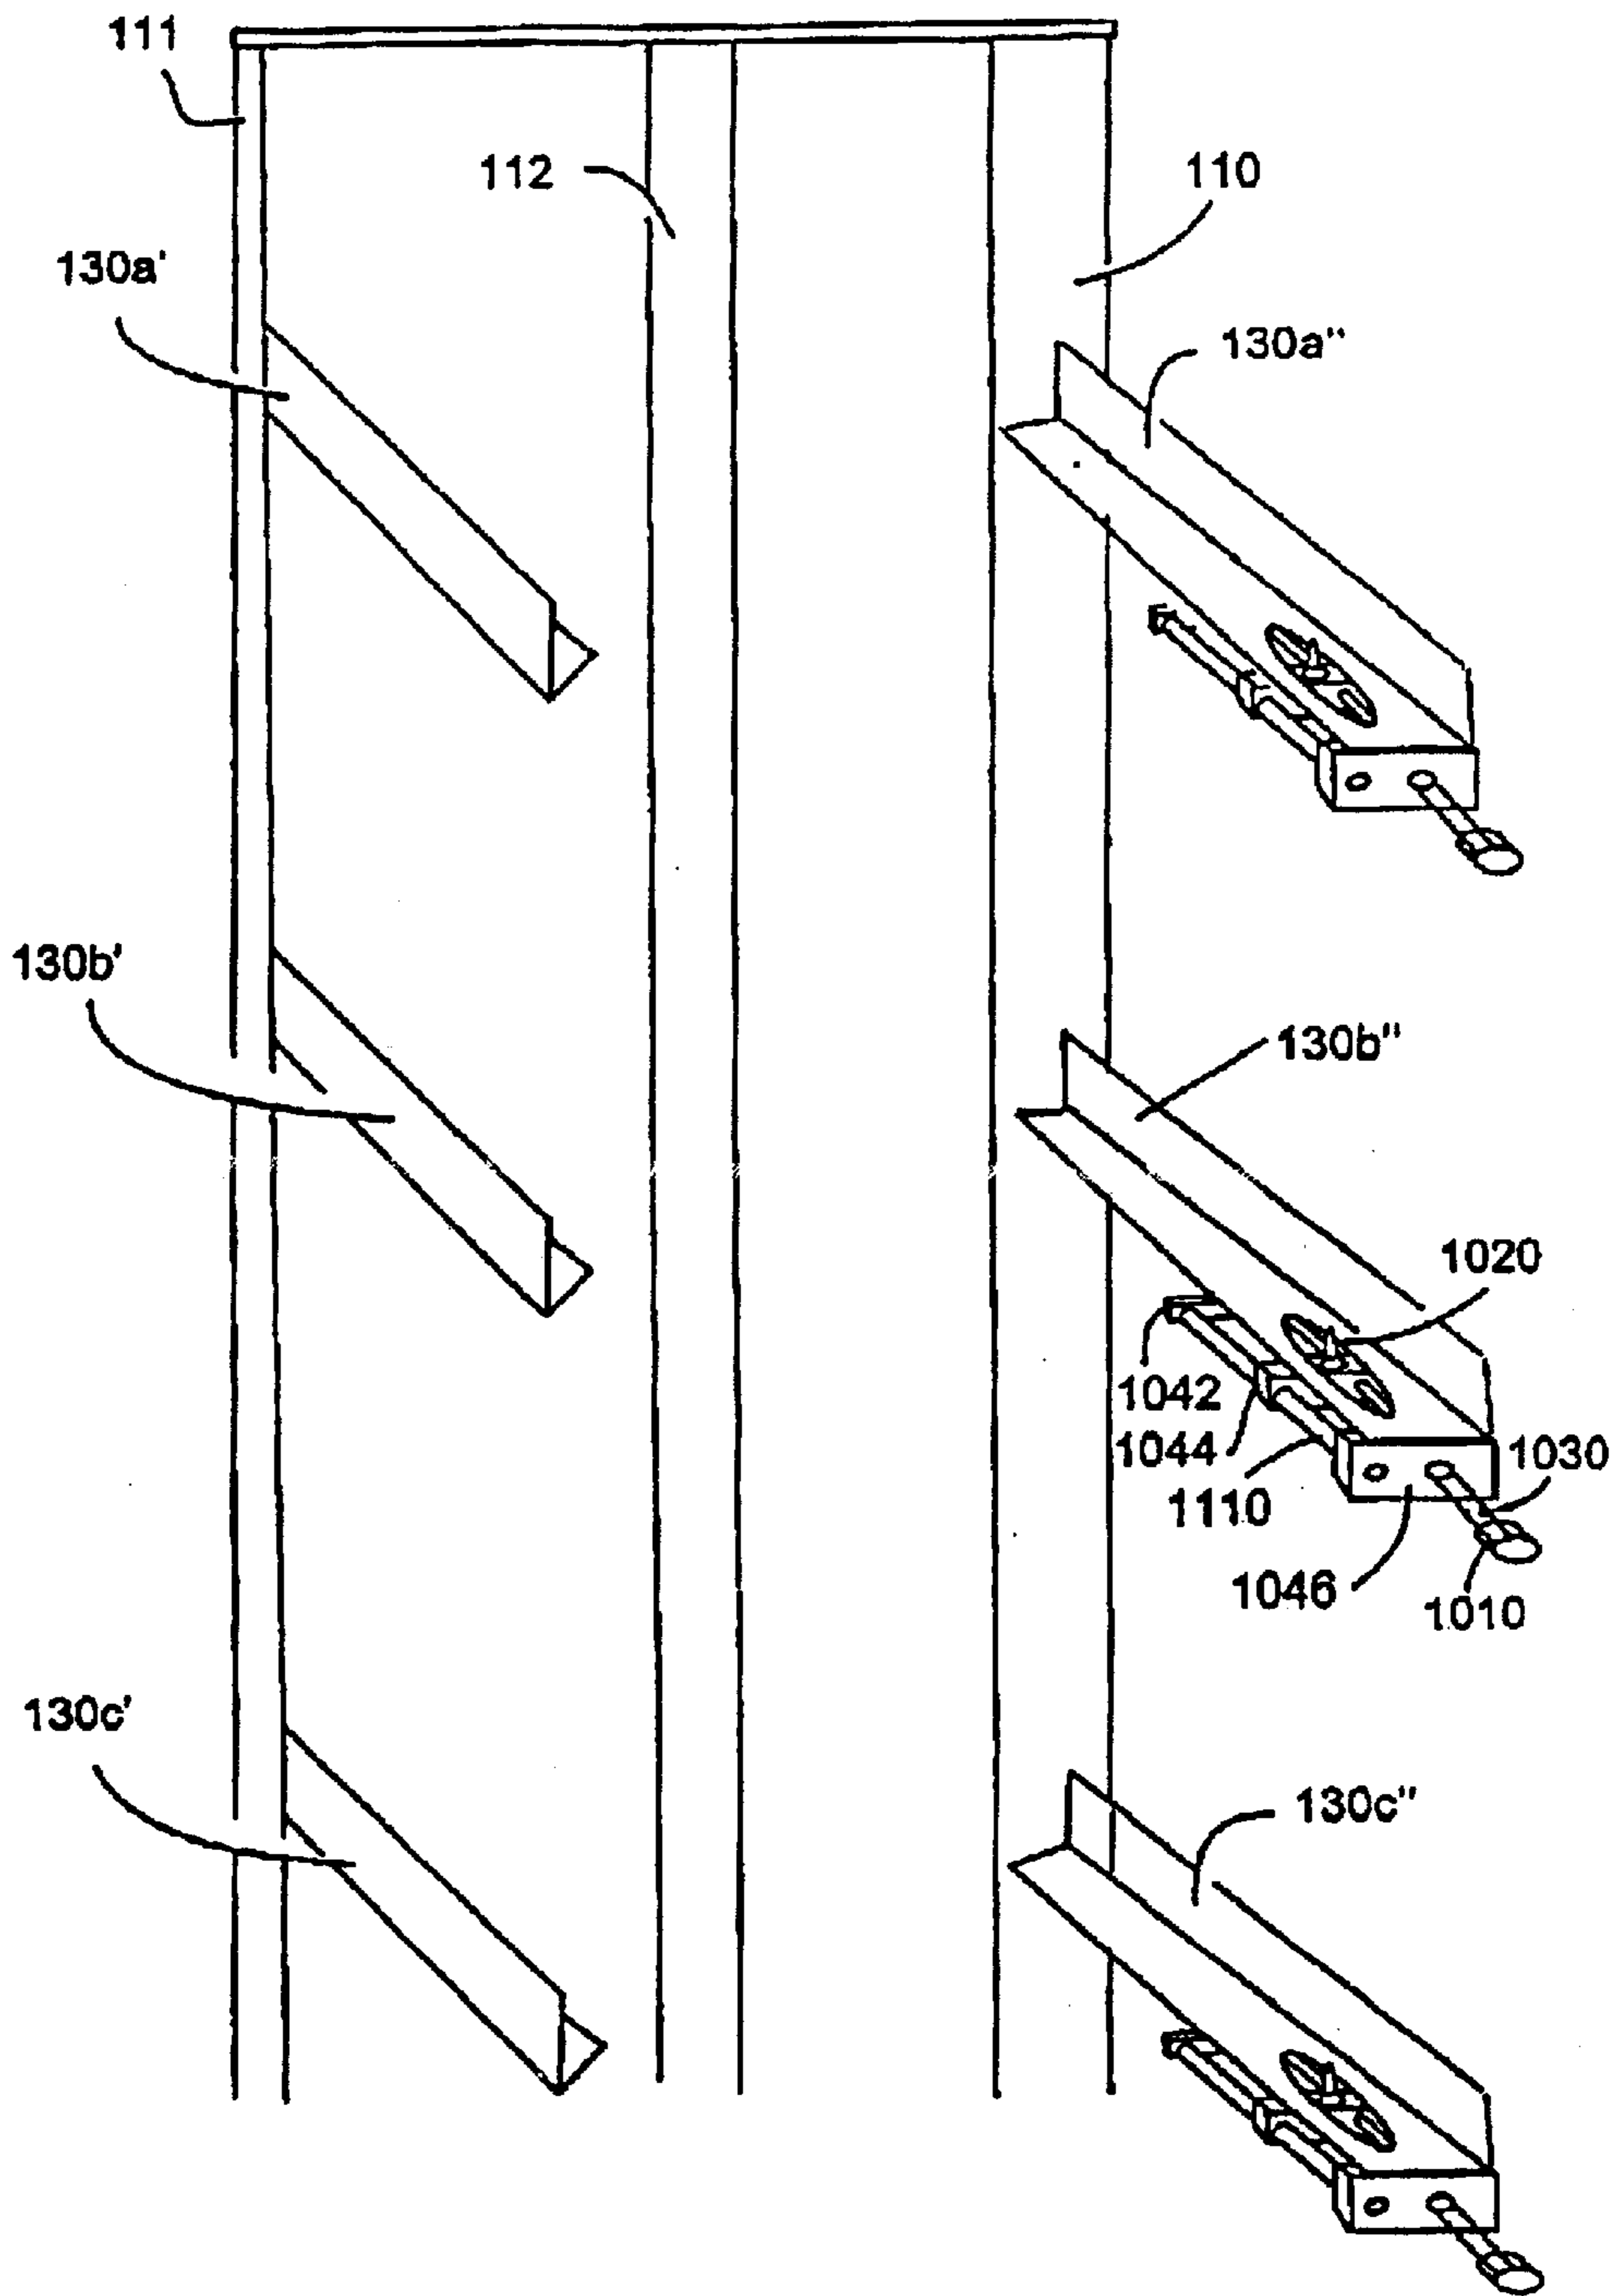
TOWER WITH HOPPER ADJUSTMENT ASSEMBLY
